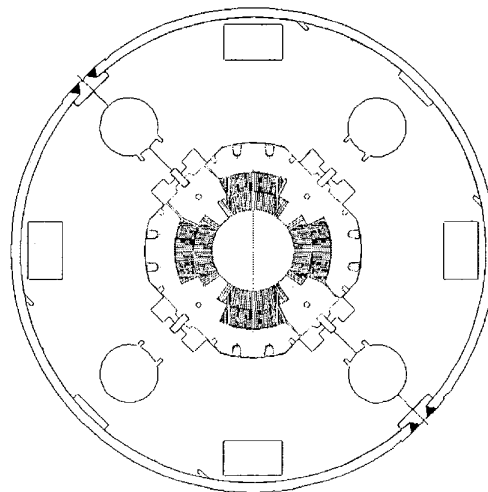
Magnet cross-section. The coil bore diameter is 70 mm and the skin outside diameter 416 mm.
